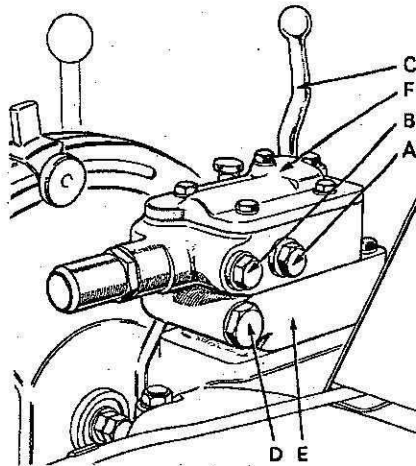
On model 1200, where special test plate which is installed in place of control valve cover (F) is not available, check pressure by connecting test gage to remote port (A or B) and pressurizing that port. Control lever must be held to keep it from returning to neutral when detent release pressure is reached. Plug (D) in adapter plate (E) seals external hydraulic return port.
